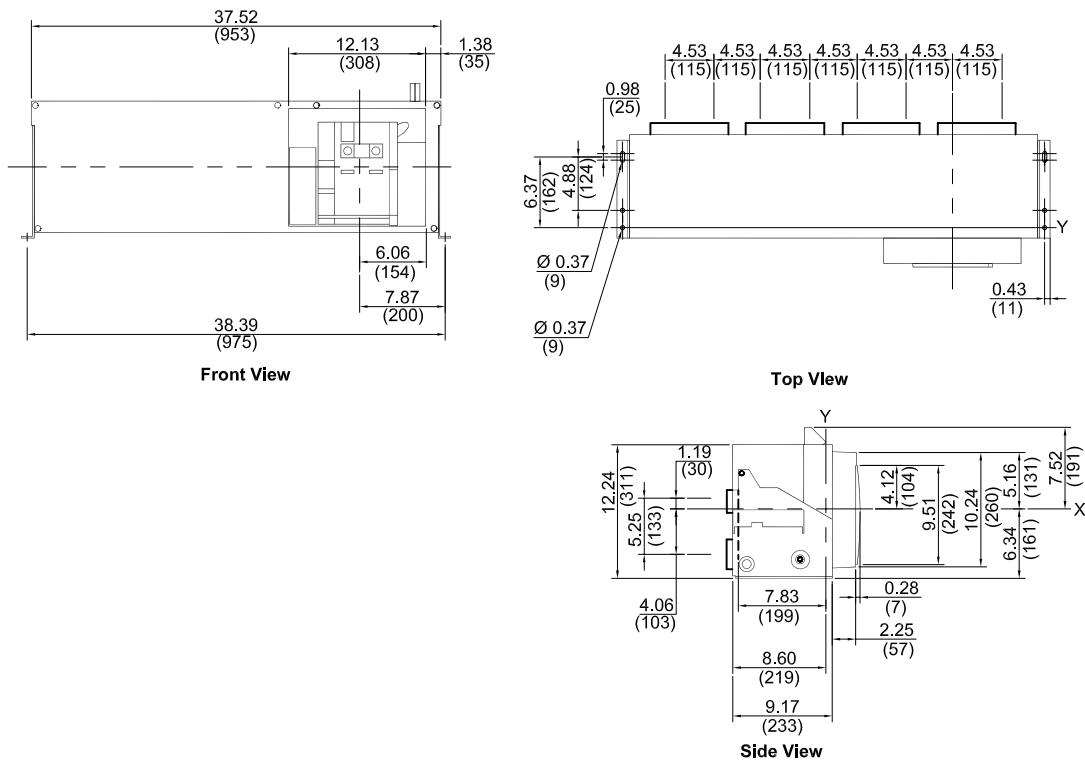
4000–6000 A Master DrawingDimensions: in (mm)
